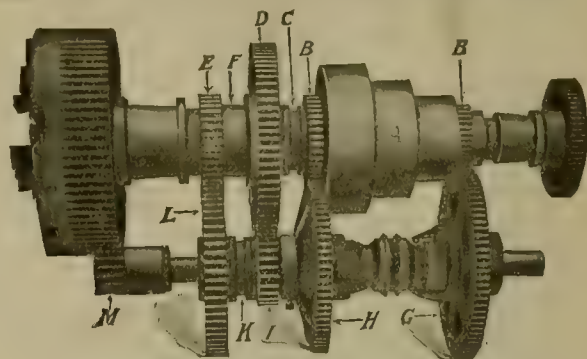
Lathe Spindle, Cone, Chuck and Driving Gearing.
